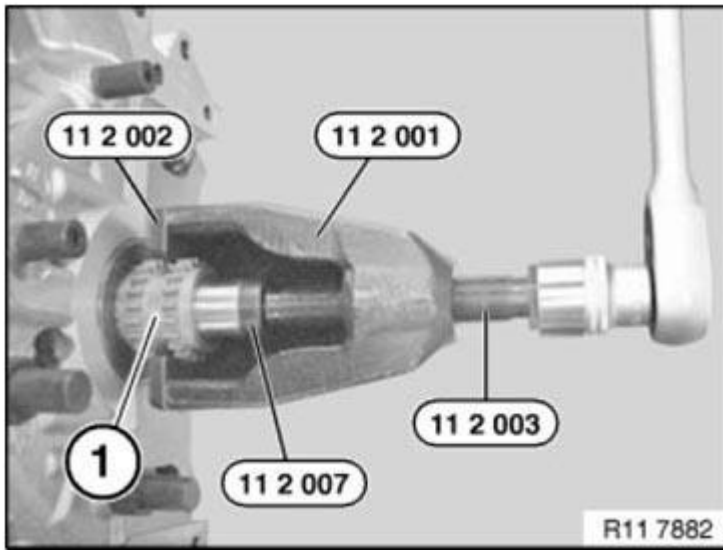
Removing Sprocket Wheel With Special Tool 11 2 003
